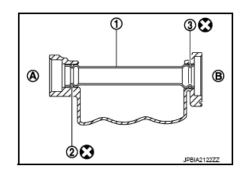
Installing Oil Pan (Upper) Axle Pipe
